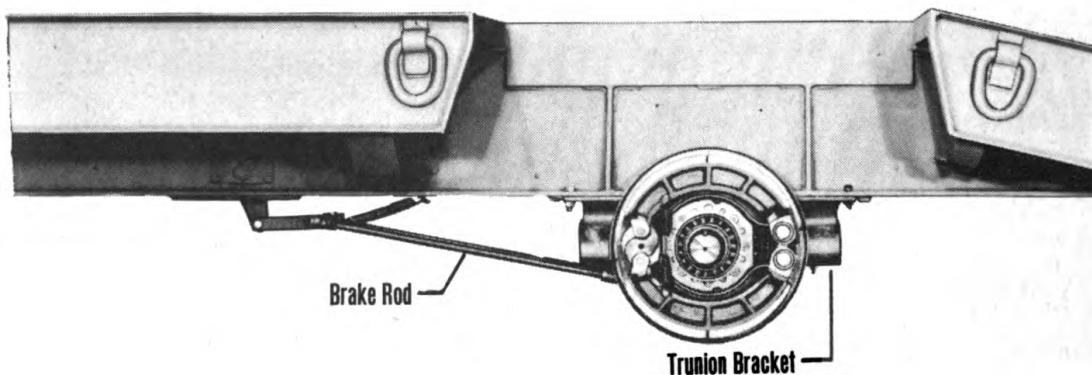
Rear Axle, with Outer Hub and Drum Removed
